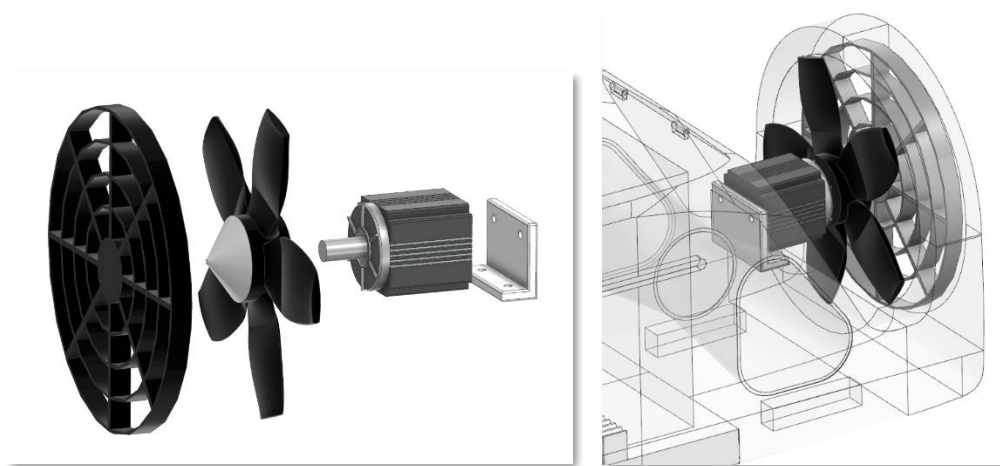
MAIN PROPELLER SUB-ASSEMBLY
